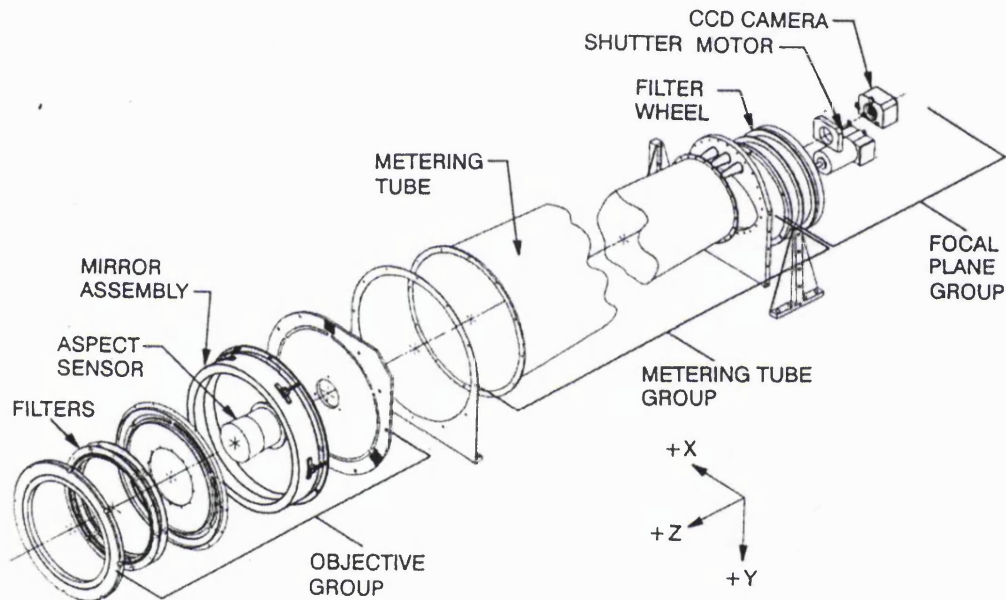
A Yohkoh/SXT exploded diagram illustrating the optical layout [Tsuneta et al., 1991].
